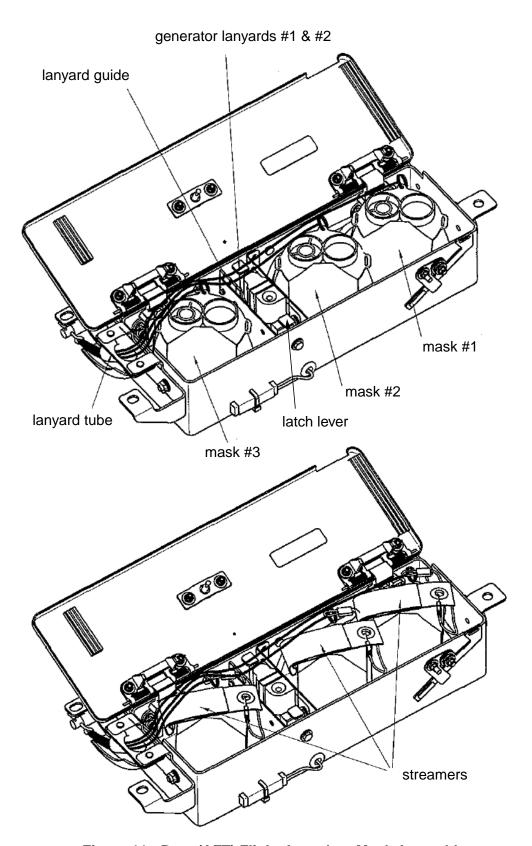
Rear (AFT) Flight Attendant Mask Assembly
